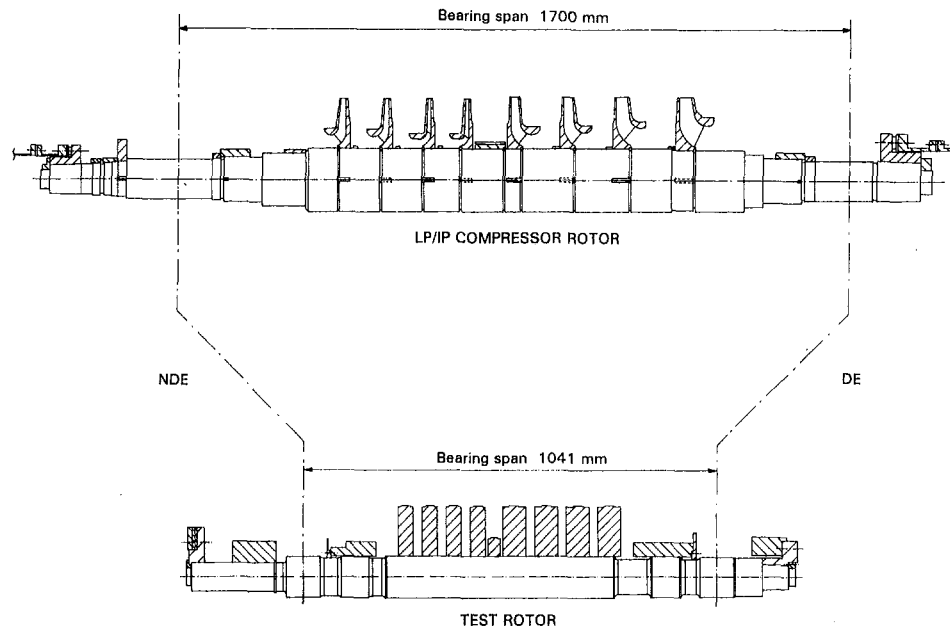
Comparison of LP/IP compressor rotor and test rotor
